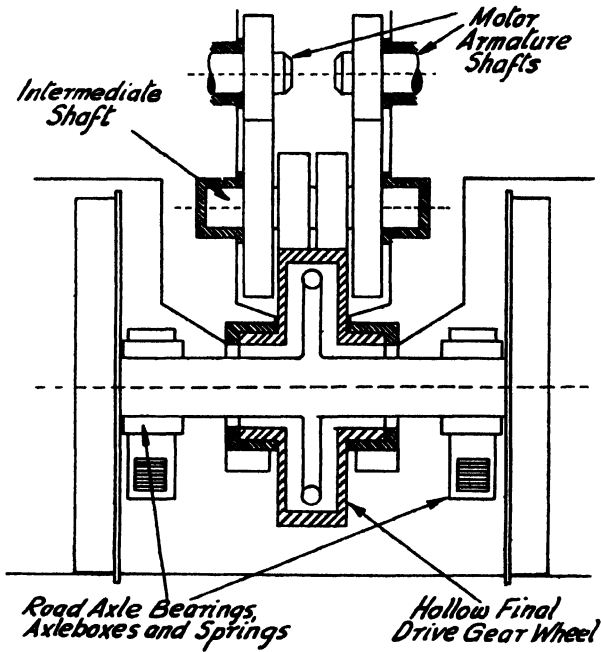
CROSS-SECTION THROUGH WINTERTHUP UNIVERSAL DRIVE, SHOWING DETAILS OF DRIVE AND SPIDER ON MAIN AXLE. FOR ASSEMBLY OF FLEXIBLE DRIVE, SEE FIG. 38b BELOW
